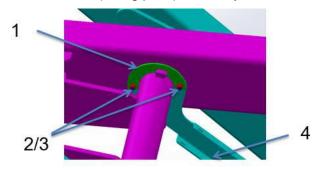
Fifth fork (wiring plate) assembly 1. Arc plate 2. Nut 3. Bolt 4. Wiring plate assembly
